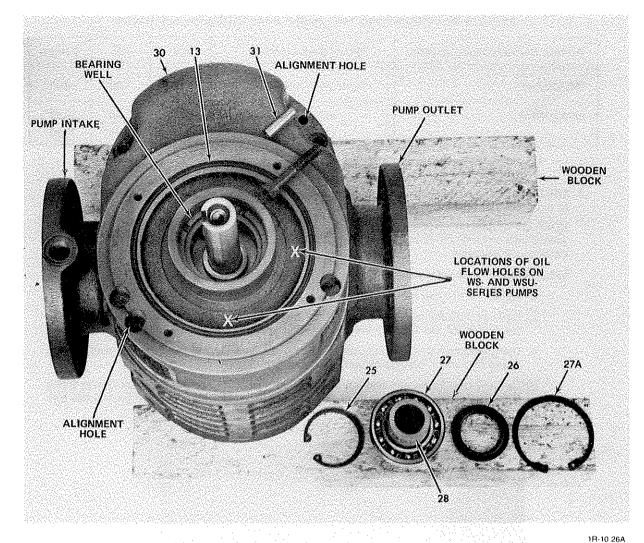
Securing the Intermediate Flange and Loading its Bearing Well (WA-250 pump model shown).
